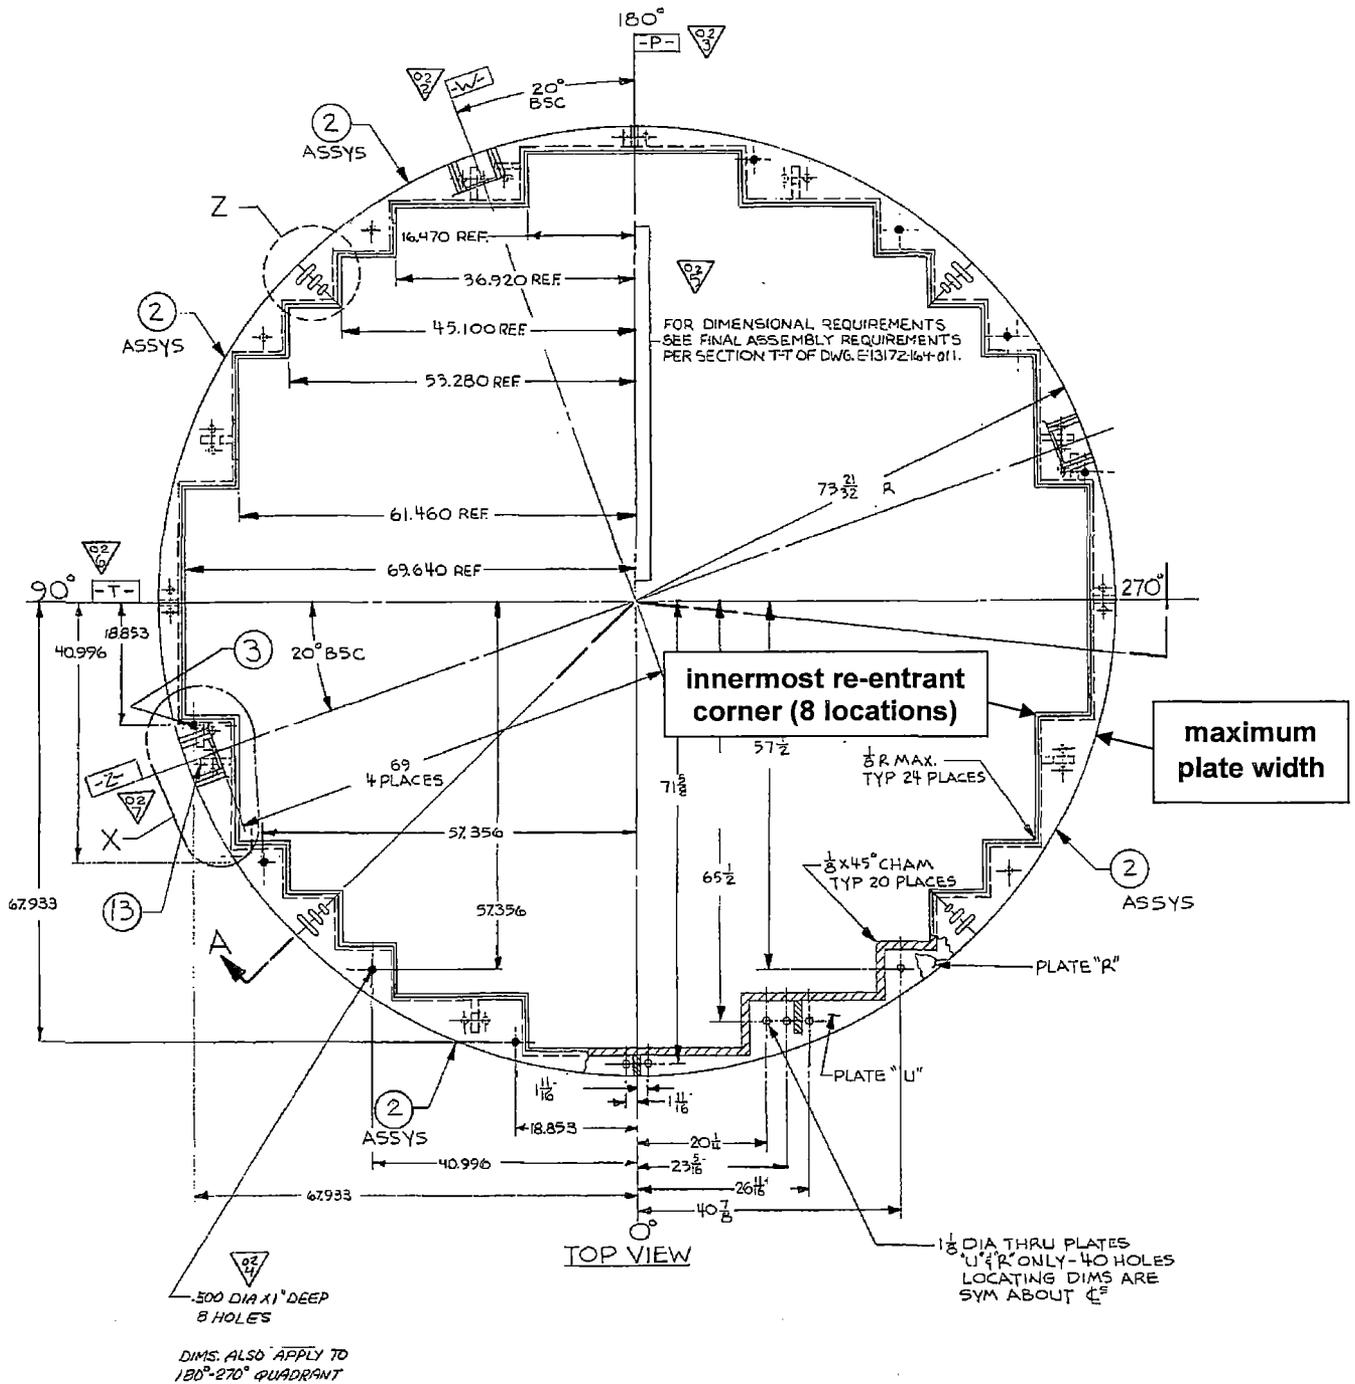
SL2 Core Shroud Assembly – Plan View
